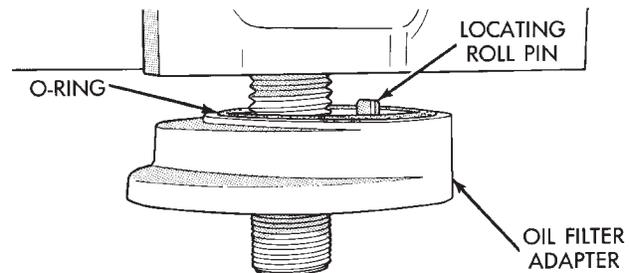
Engine Oil Filter Adapter to Engine Block OIL FILTER
